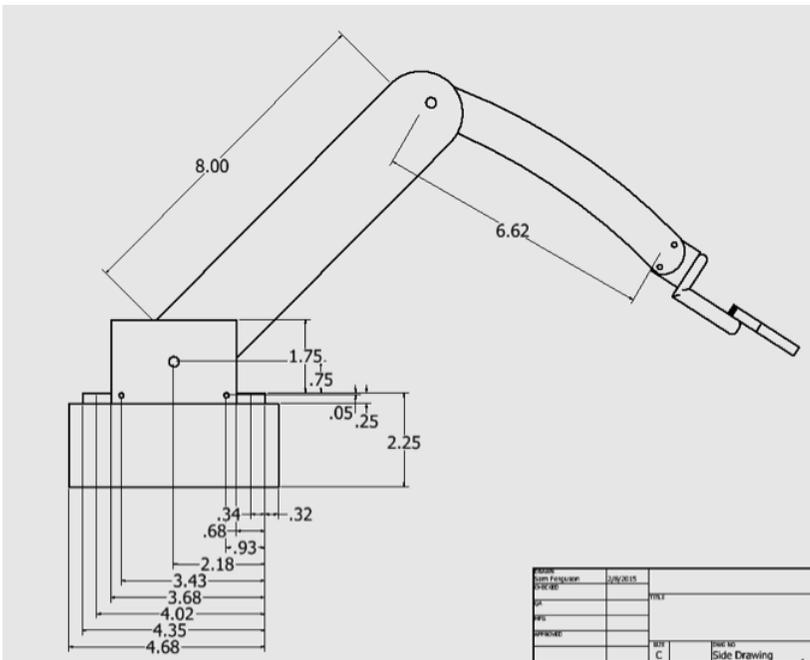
Side view of CAD drawing of the version 1.0 (dimensions in inches).
